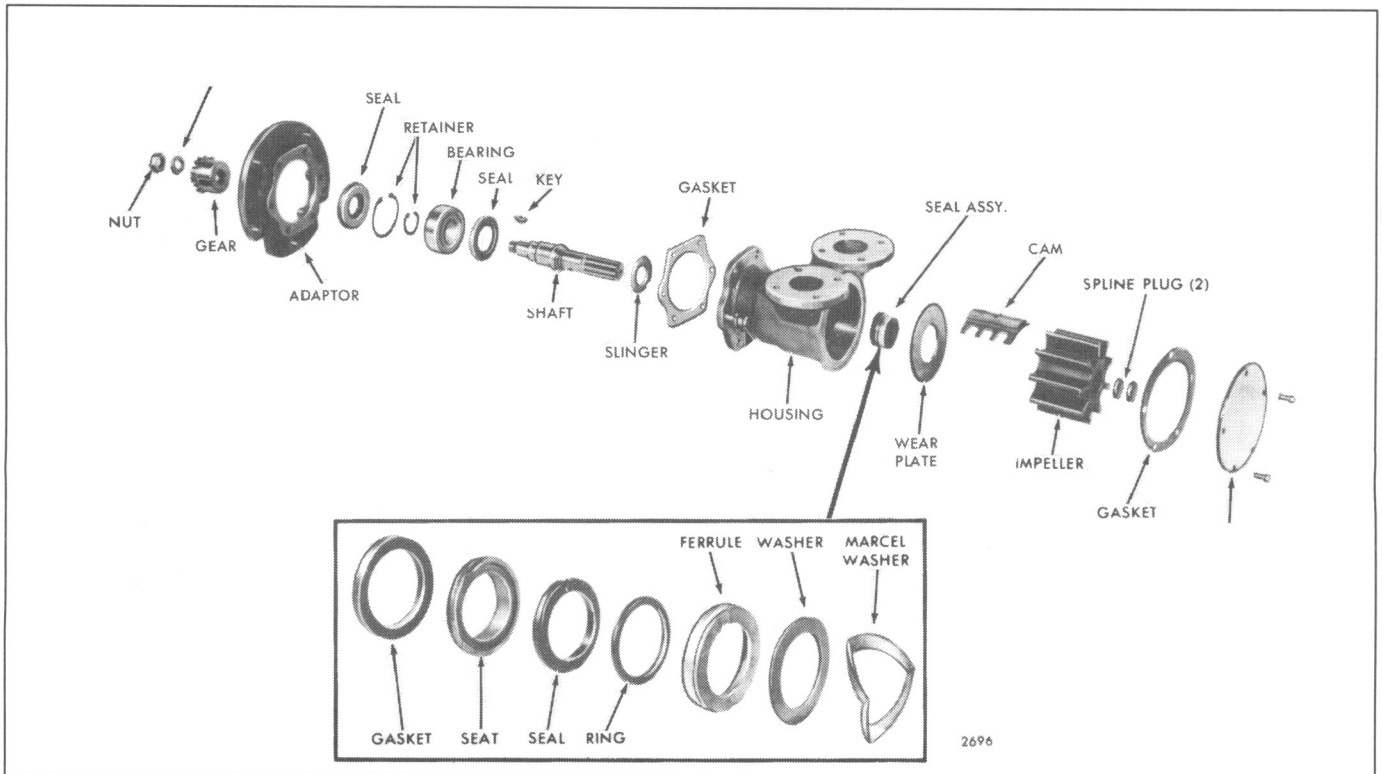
Raw Water Pump Details and Relative Location of Parts
